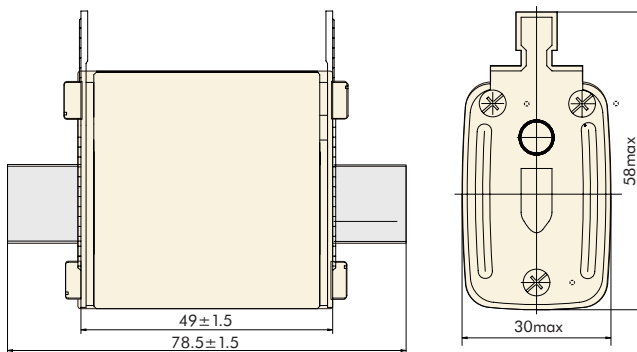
CRT36-00 600A Fuse-link appearance dimensions
